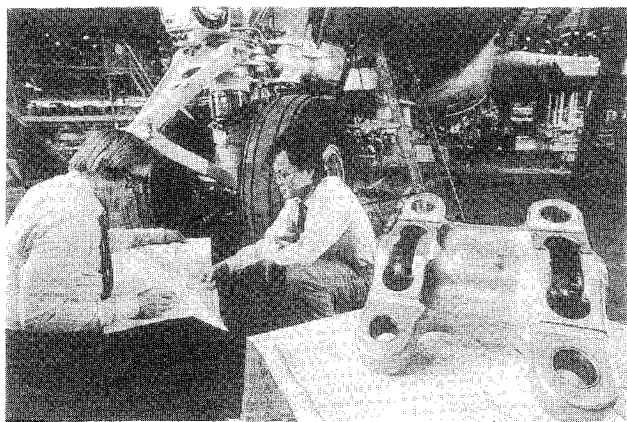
The 2090 forging that serves as tow fitting on a Boeing 747 landing gear (courtesy Aluminum Company of America).
